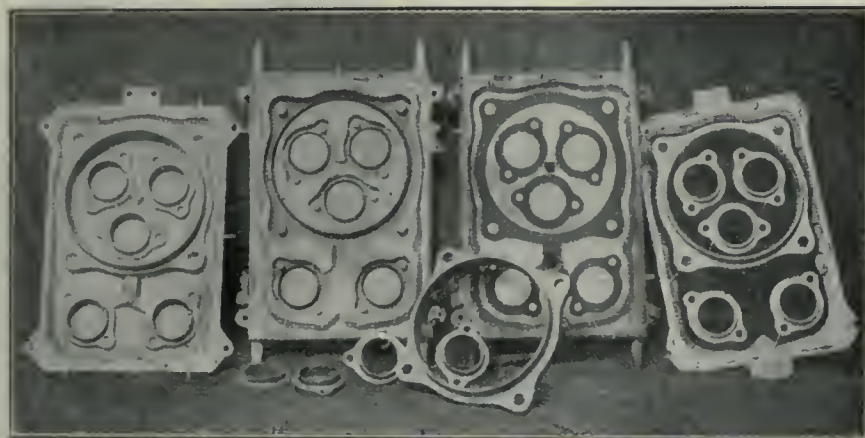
PATTERN PLATE, MOLD AND DUMMY.
